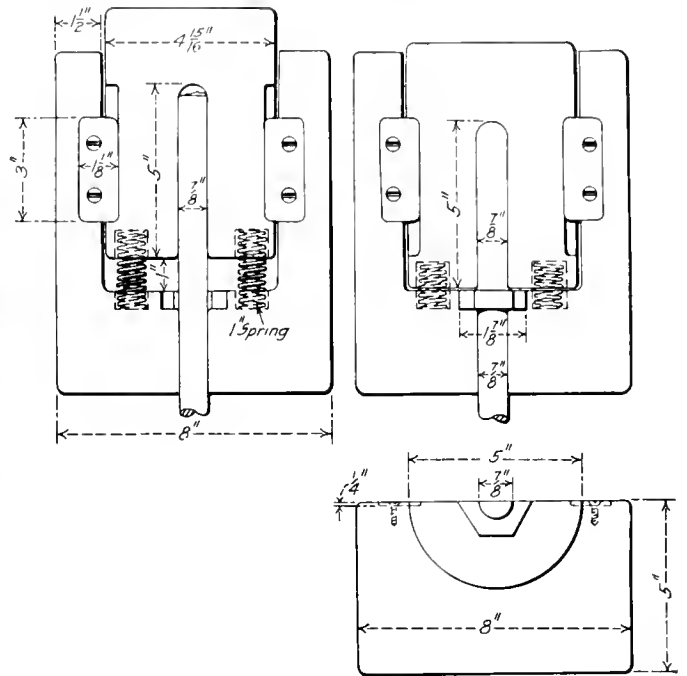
Dies for Making Wedge Bolts; Norfolk & Western.
